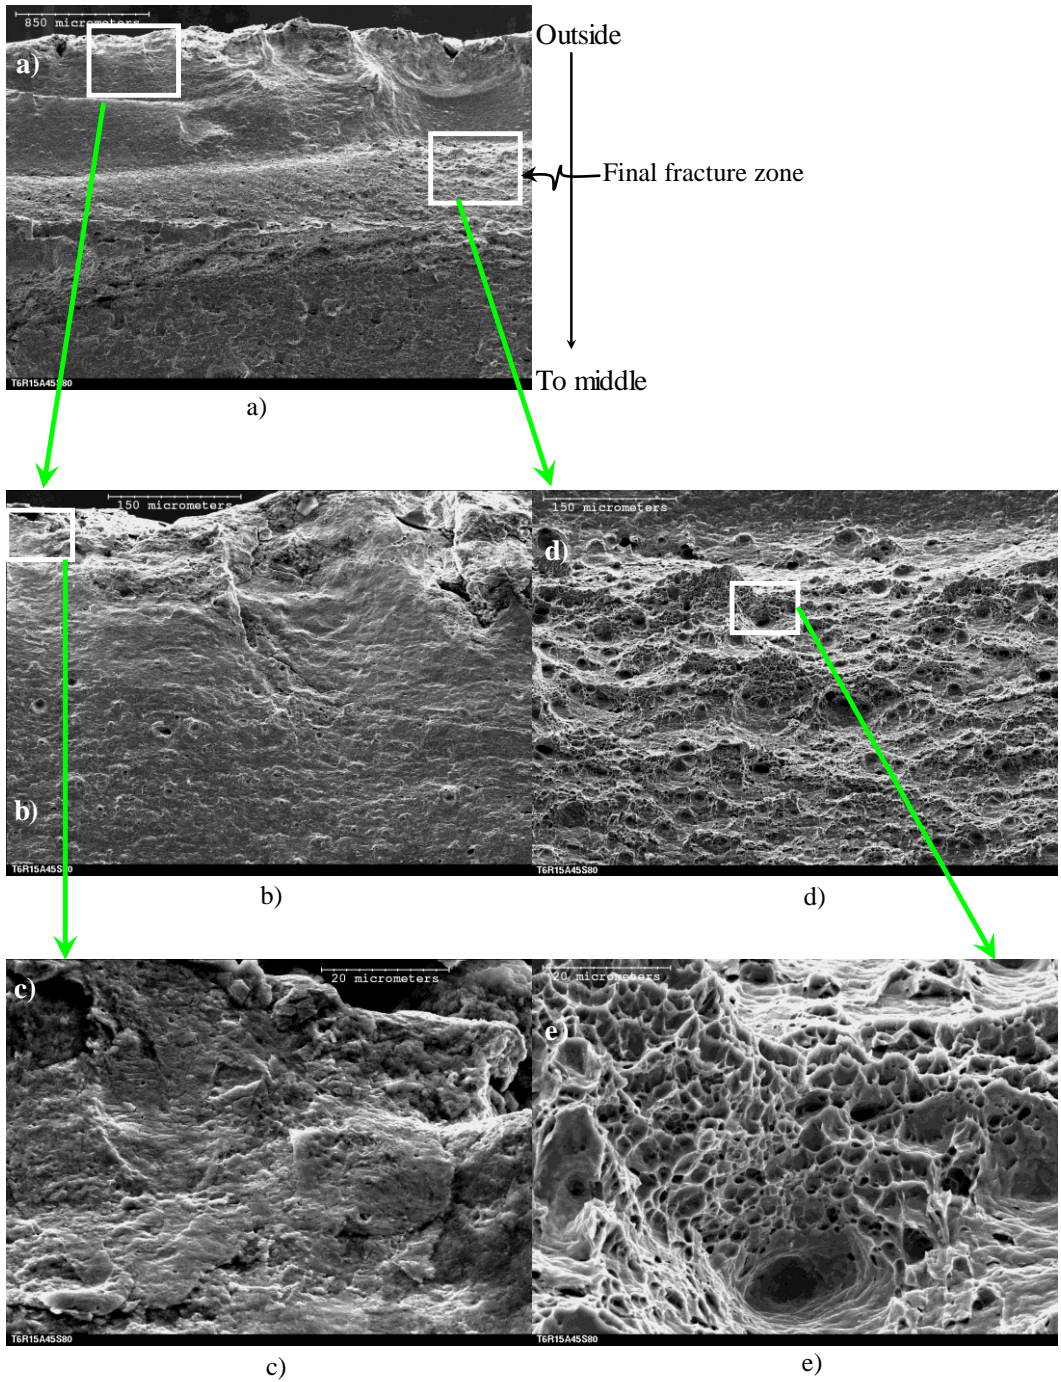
Top half of the fracture surface of specimen T6R15A45S80 (SEM)
